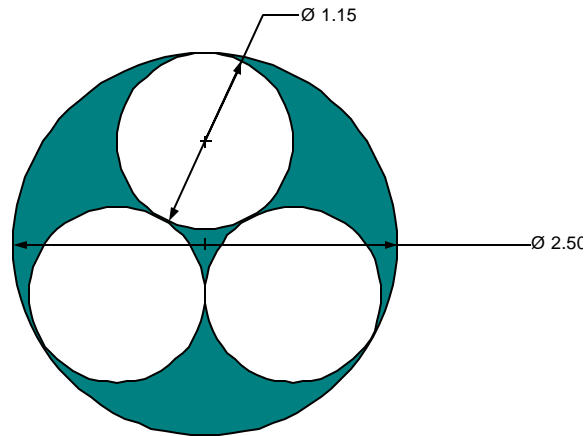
Initial Electrodischarge Machining Pattern for SMA Torque Tube
